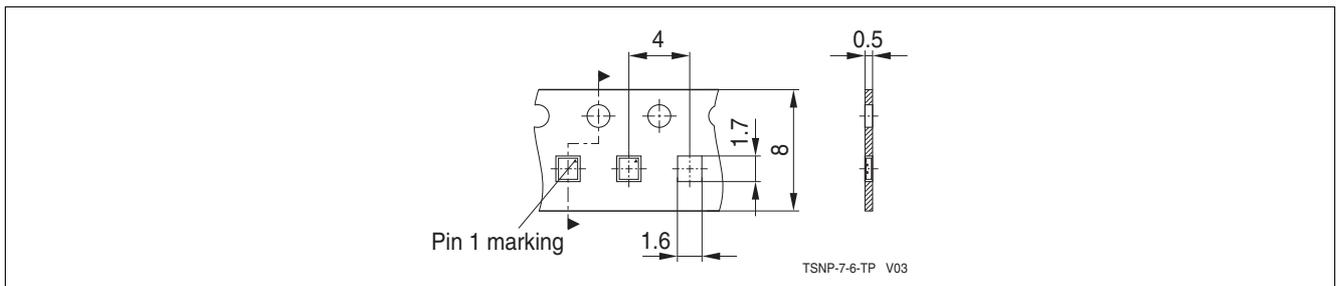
Tape & Reel Dimensions (Ø reel 180 mm, pieces/reel 7500)
